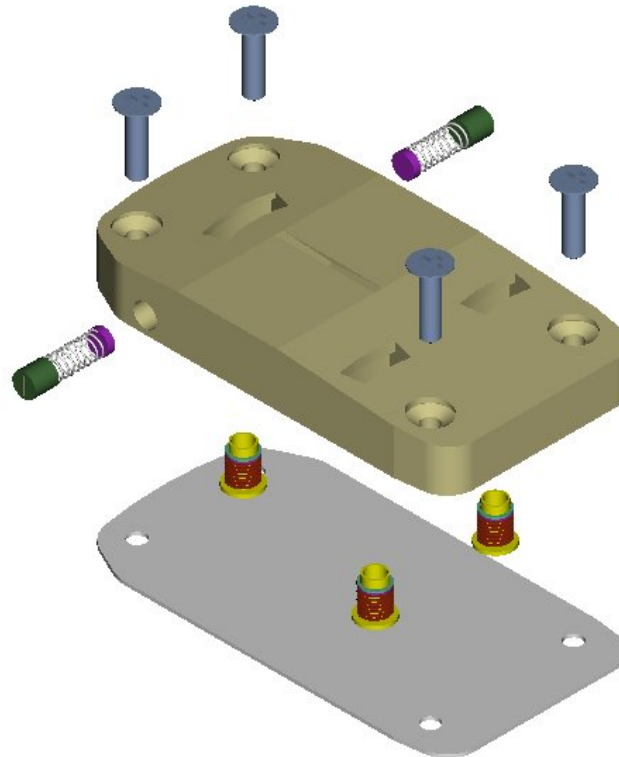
exploded view of friction plate, mesoplate, compression springs (on side of mesoplate), and spring assembly described above
